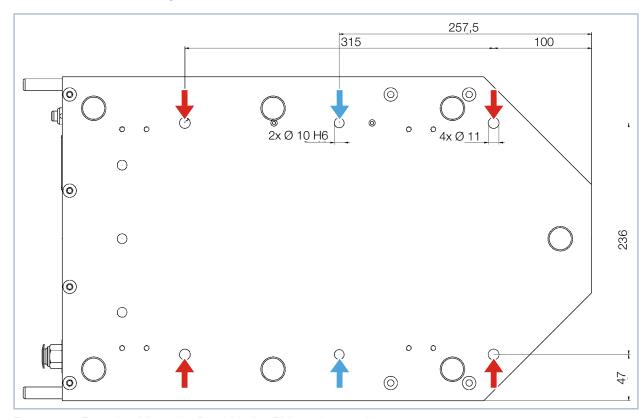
Fastening drills on the PowerMonitor PM 100, bottom view
